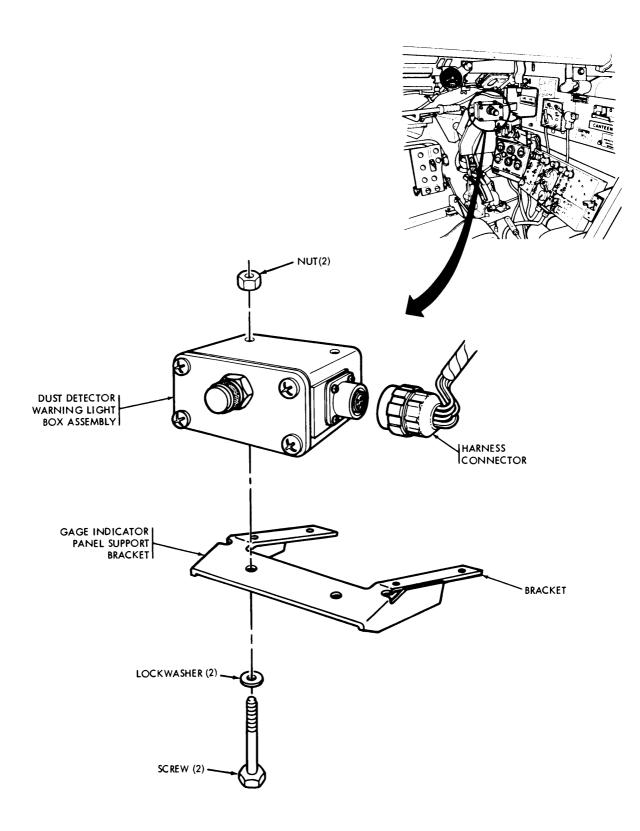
Dust detector warning light box assembly replacement (M728).
